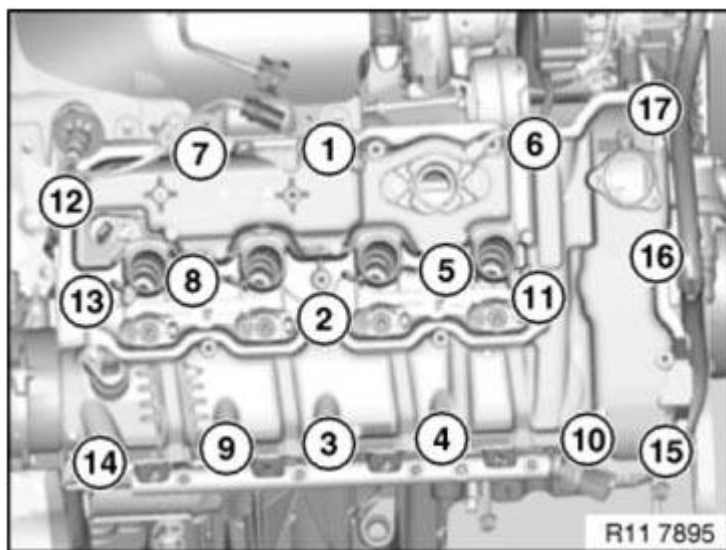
Identifying Cylinder Head Cover Bolts Releasing Sequence
